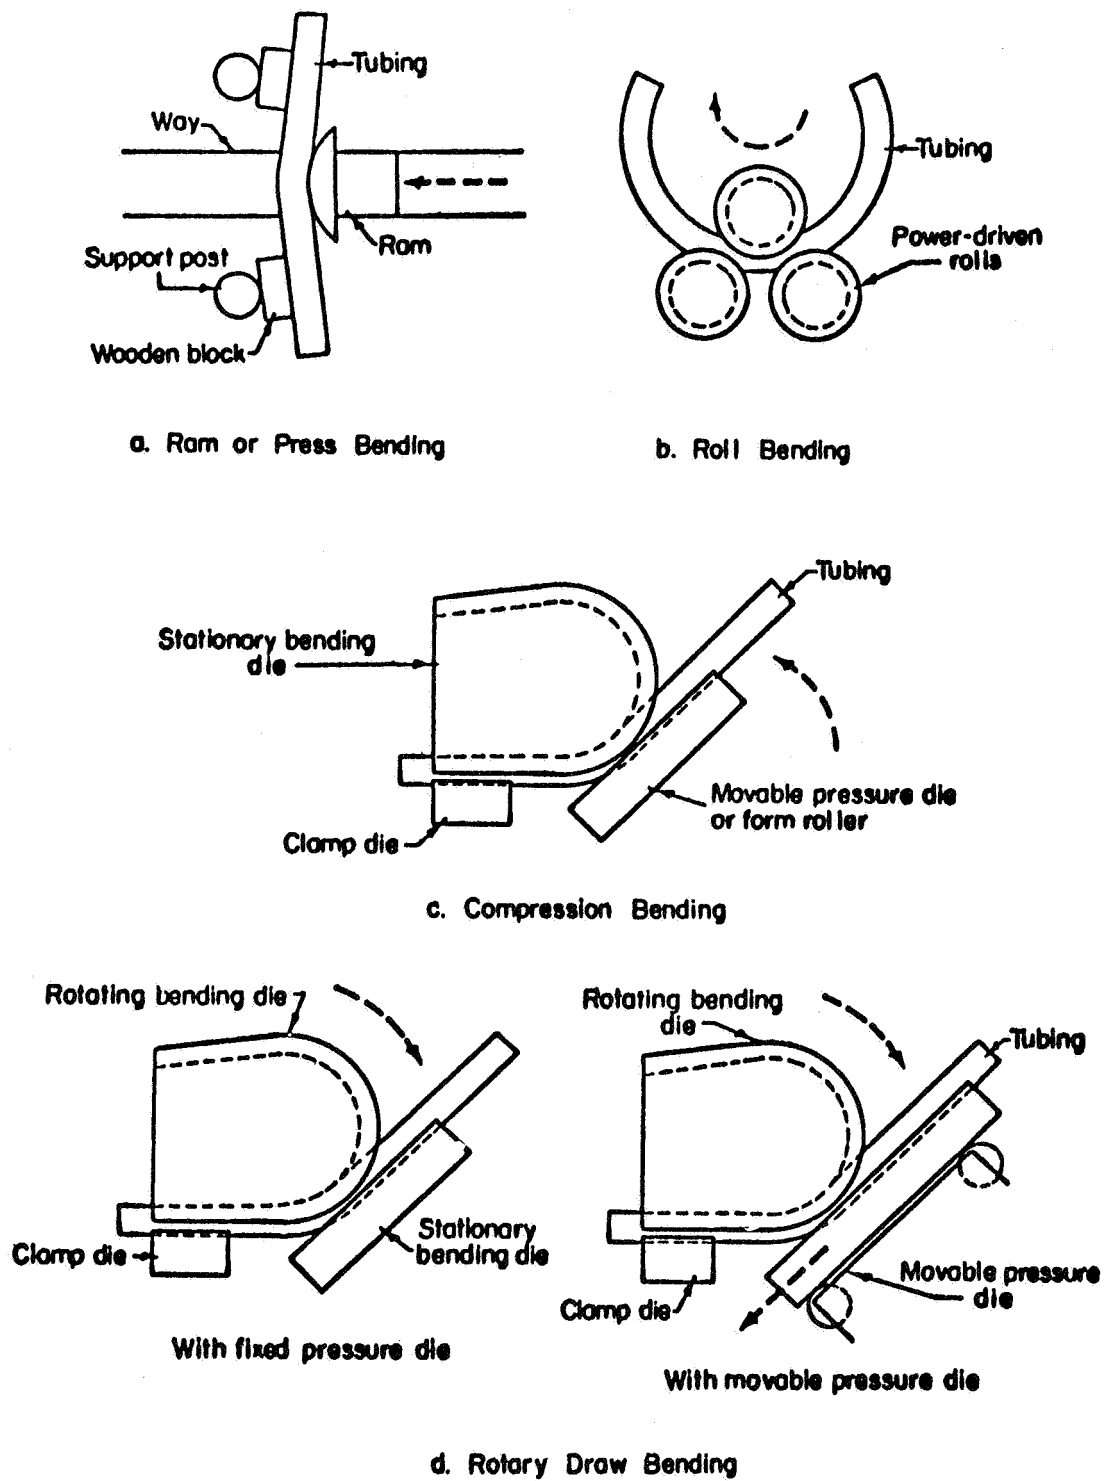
METHODS OF TUBE BENDING (REF. 57)
